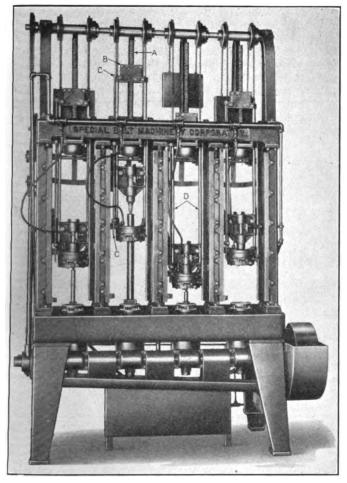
The Foster Bolt Turning Machine Designed to Turn Bolts on Centers from Forged Blanks
